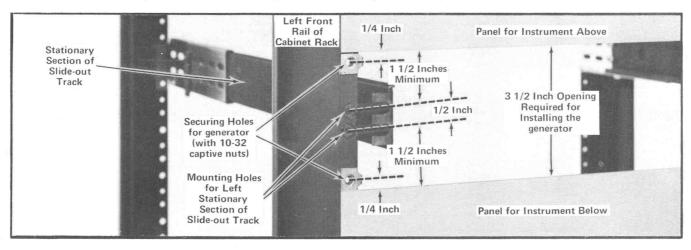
Vertical mounting position of the left stationary section and location of the securing holes. These same dimensions apply to the right front rail.
